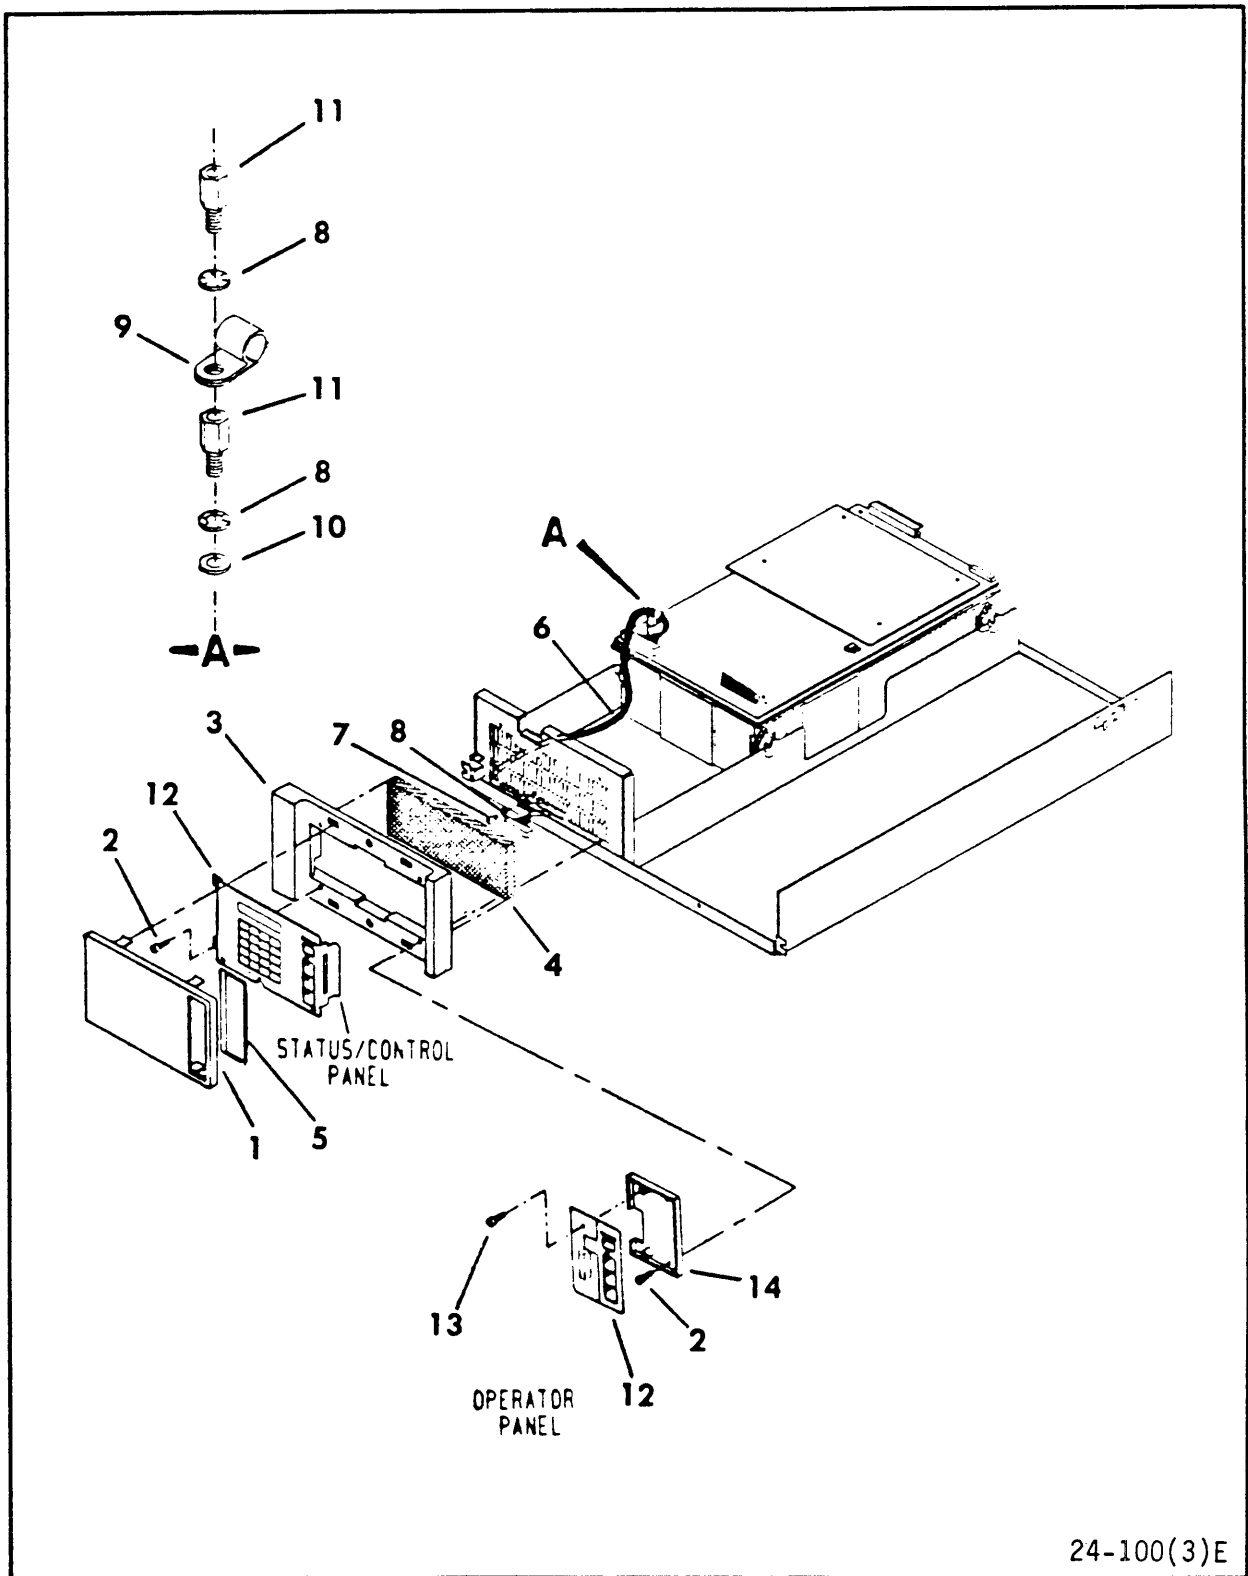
Eight-Inch Module Drive (Sheet 3)
